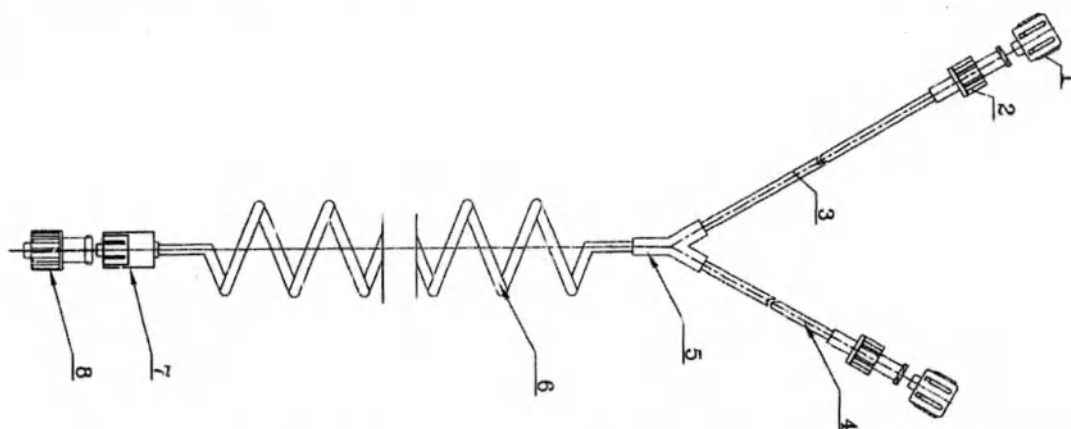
Y-type connecting tube with 2 valves: 42.04.90000, 42.02.90002
